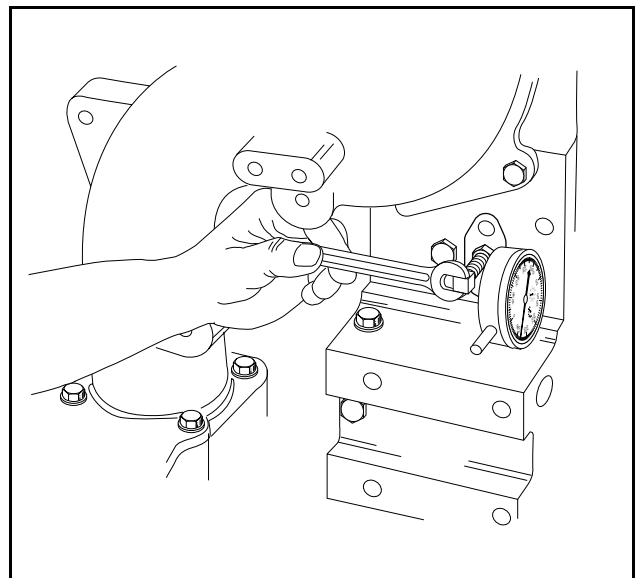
Typical Example Of Adjustment Of The Fuel Setting Screw
